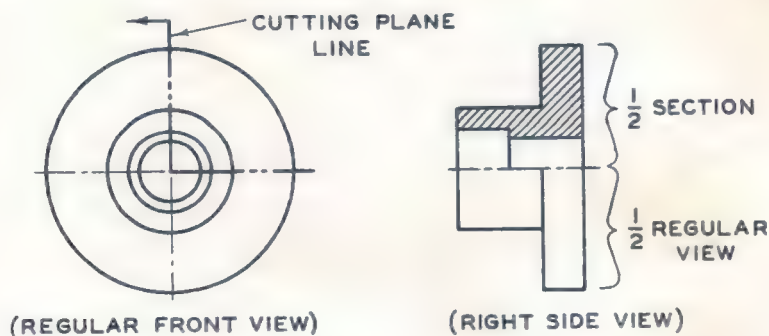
CUTTING PLANE LINE AND HALF SECTION VIEW
